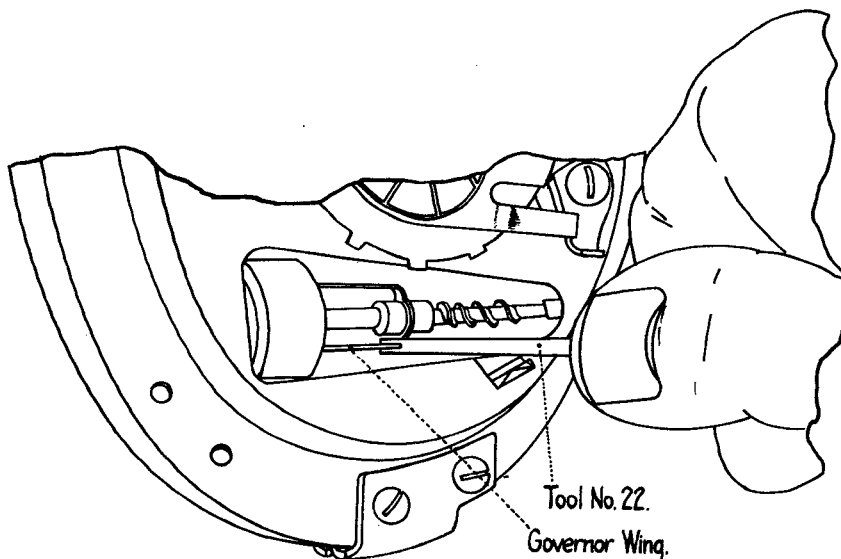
Showing how the Governor Wings should be adjusted. Tool No. 22 setting the Governor Wing at the root.
